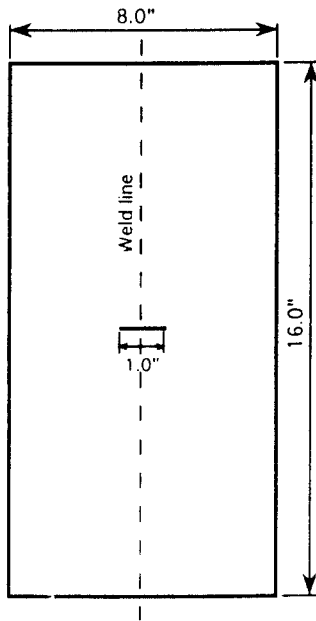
Specimen geometry of a welded thin plate with a center crack
